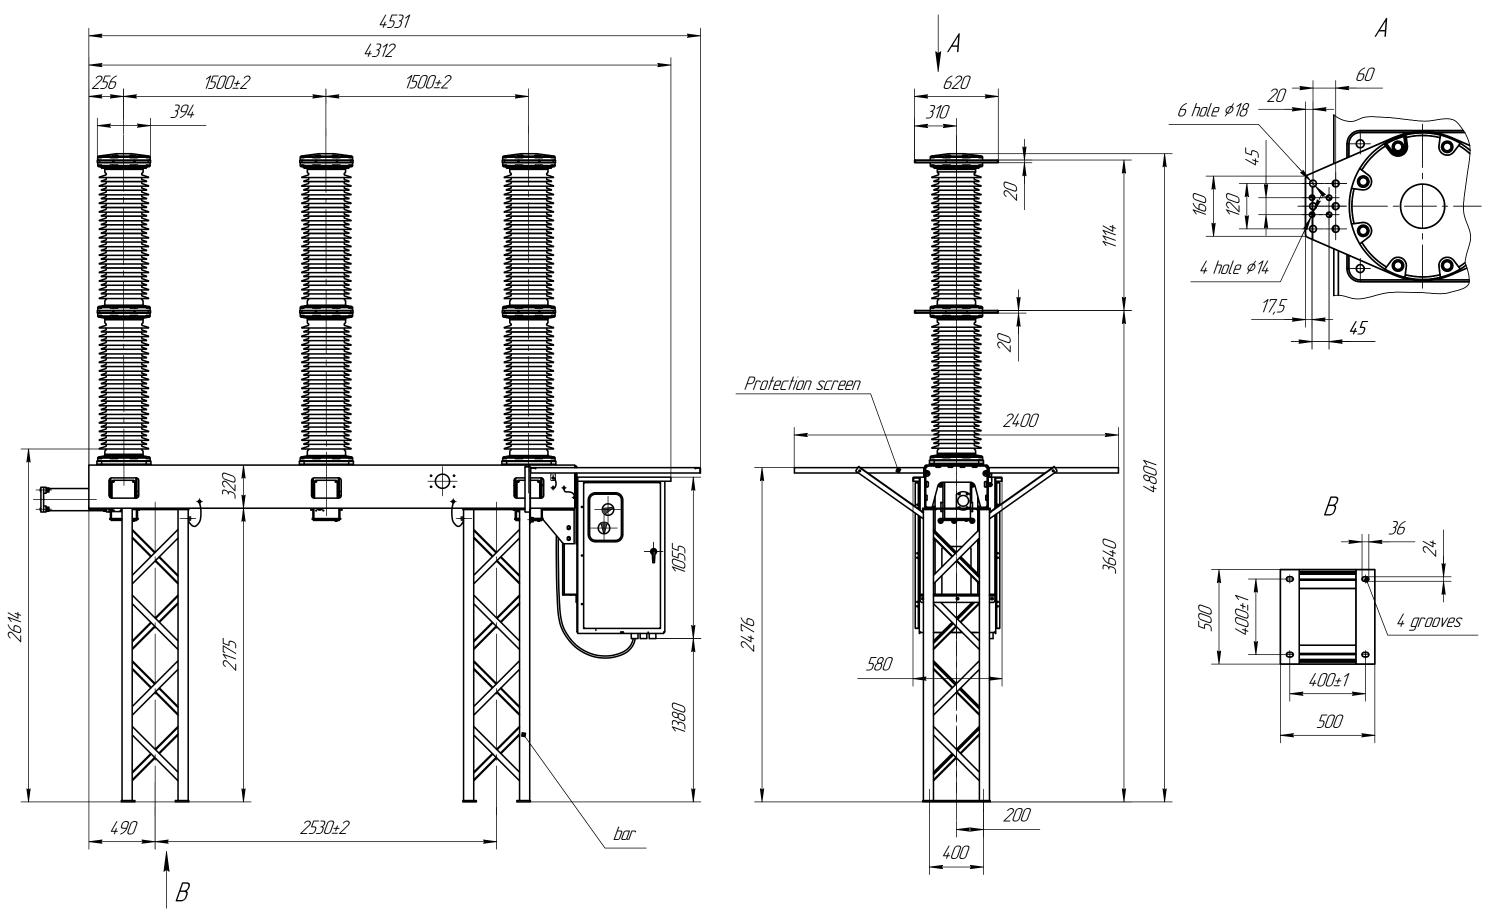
Overall, adjusting and adjoint dimensions of the vacuum circuit breakers tupe BPC–110 III–40/3150 YX/11
